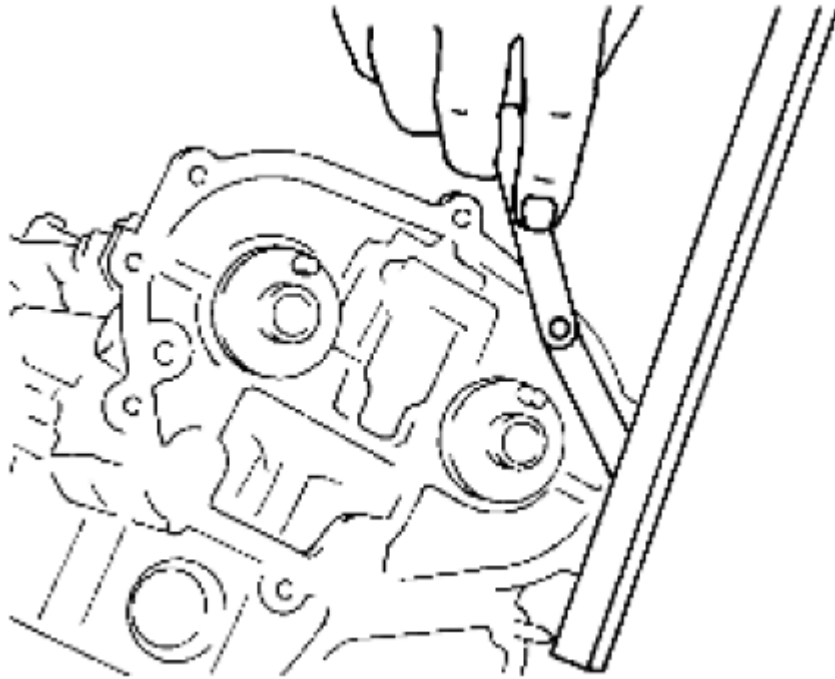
Measuring Difference In Levels Between Front End Faces Of Camshaft Bracket And Cylinder Head
